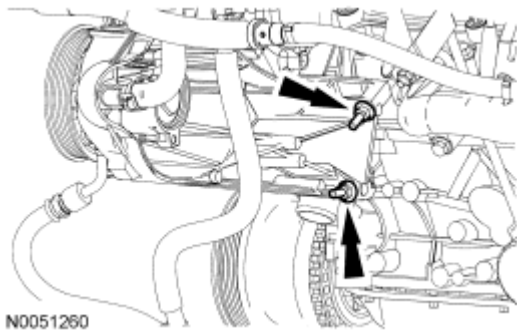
Locating Stud Bolts & Rear Of A/C Compressor Mounting Bracket
